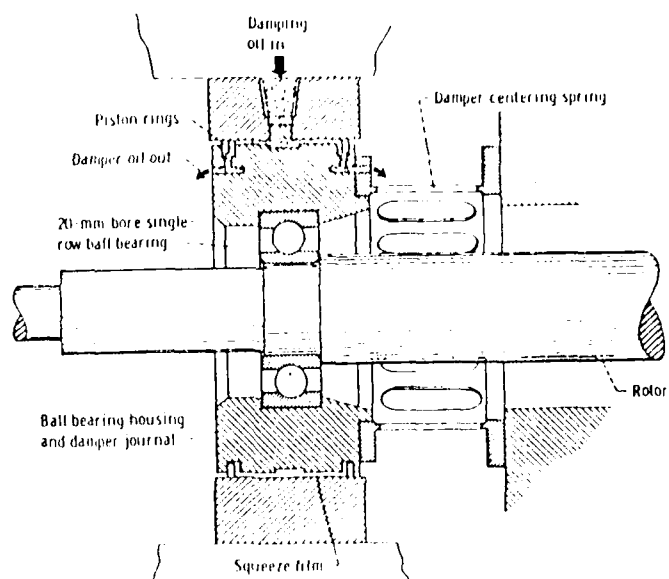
Axial Cross Section of Squeeze Film Bearing Used in NASA Experimental Work. Ref. (4)
